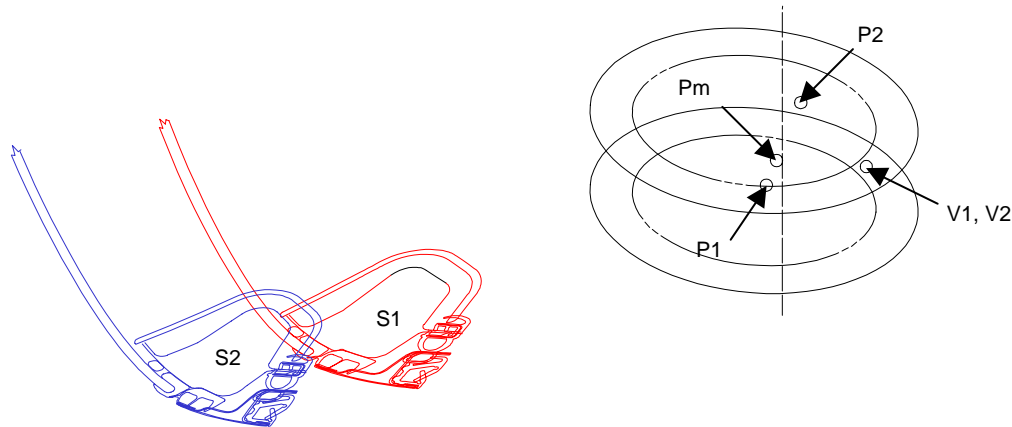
Sections S1 and S2 in Plan View
